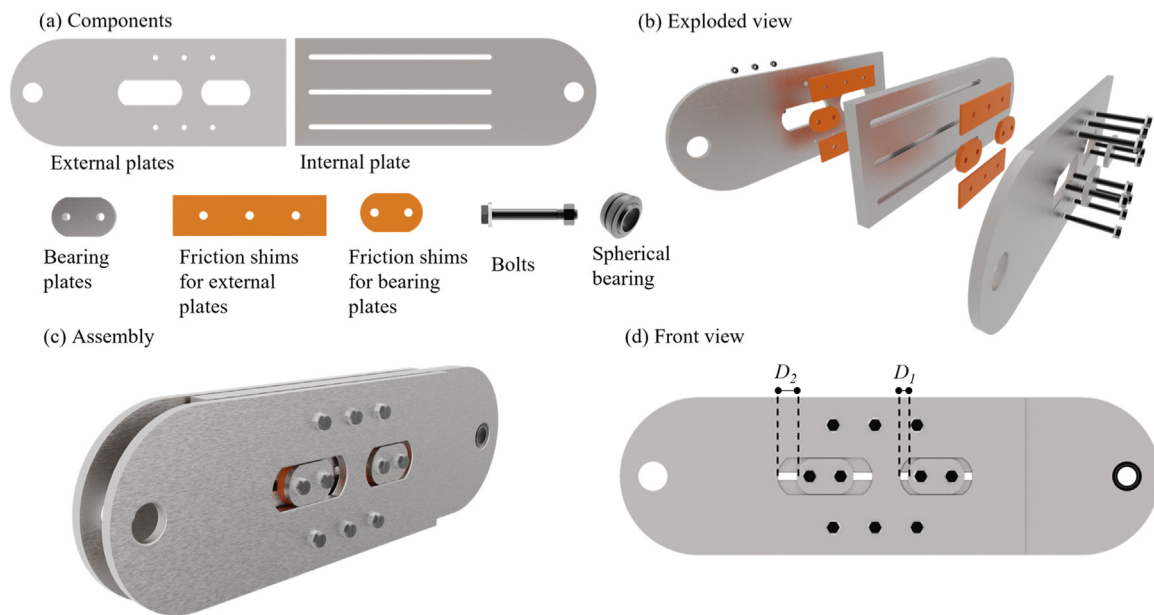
Schematics of the Modified FD (a) components, (b) exploded view, (c) assembly, and (d) front view with initial gap dimensions D_1 and D_2 between the bearing plates and the slots in the external plates.
